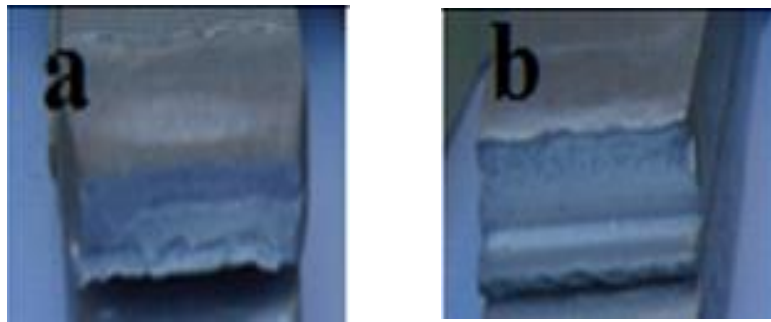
Type of fracture surface (a) Ductile fracture. (b) Brittle fracture.
